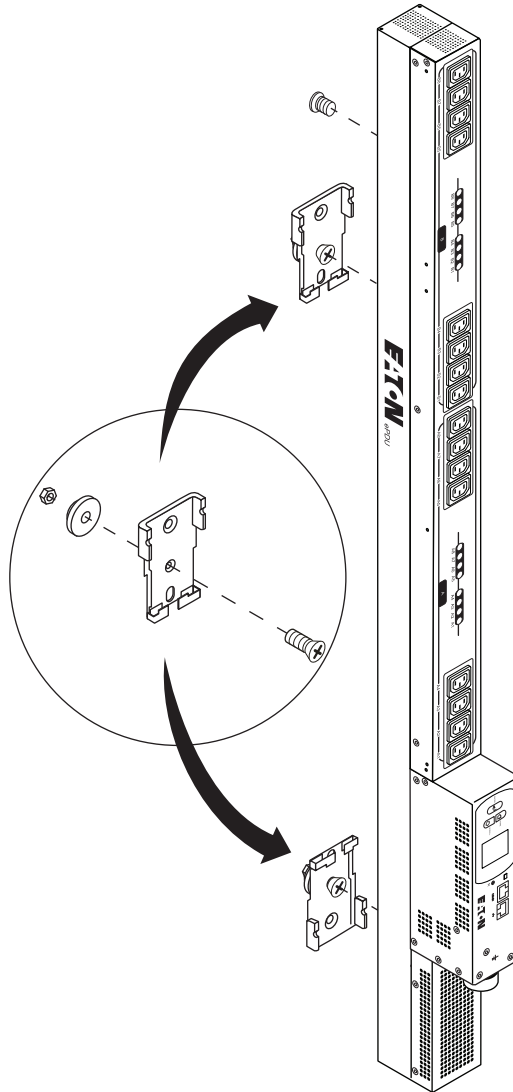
Attaching the Mounting Buttons to the Mounting Clip Feet
